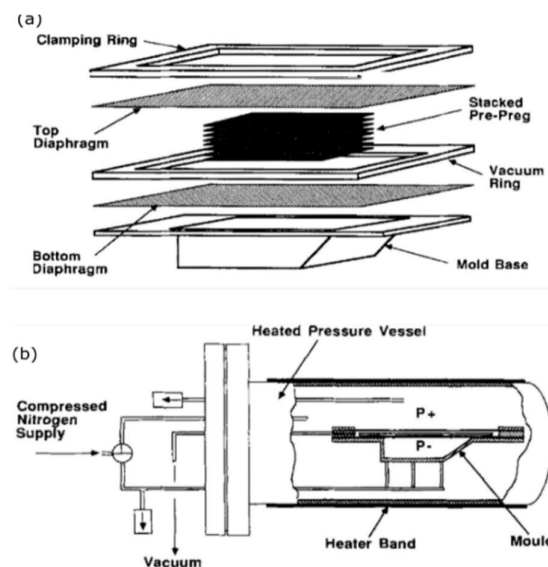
Example of diaphragm forming process. (a) exploded view of stacked prepreg, diaphragm sheet and mould (b) view of pressure chamber and heating apparatus. Adapted from [90].
